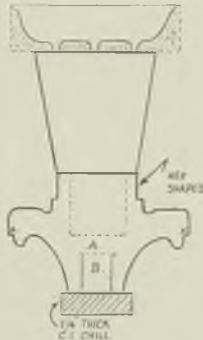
LARGE MANŒUVRING VALVE LID.
